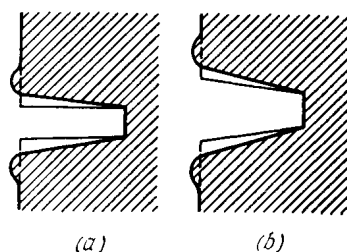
Shape changes in piston-ring grooves of aluminium pistons due to wear
